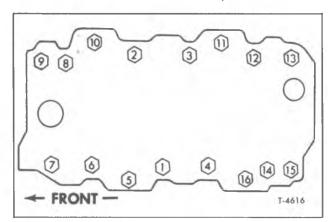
Intake Manifold Bolt Tightening Sequence on 366 and 427 V8 Engines
